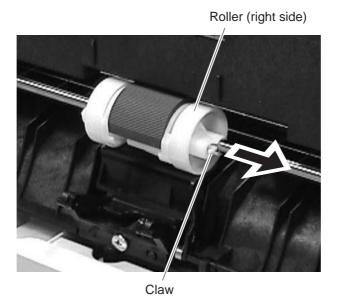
Paper Pick-up Roller (multi-purpose) 7
